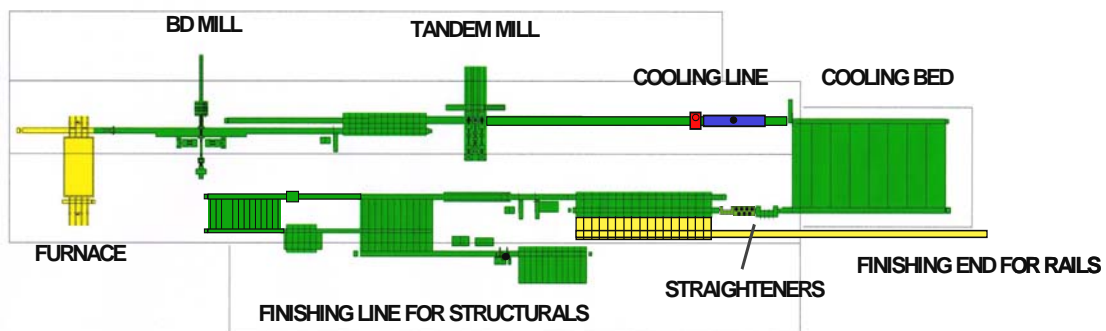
Layout of structural and rail mill steel dynamics Inc.
